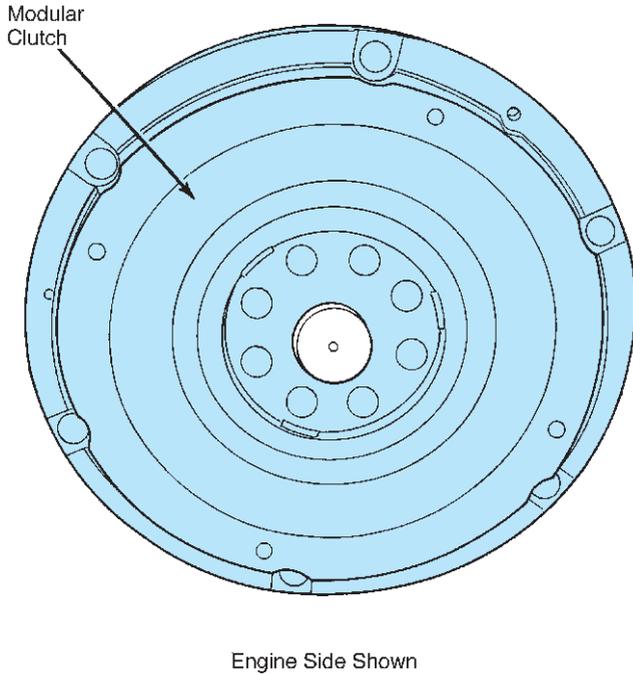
When replacing a modular clutch, the new modular assembly has a new flywheel, clutch disc, and pressure plate is bolted onto the flexplate. (Courtesy of DaimlerChrysler Corporation)
